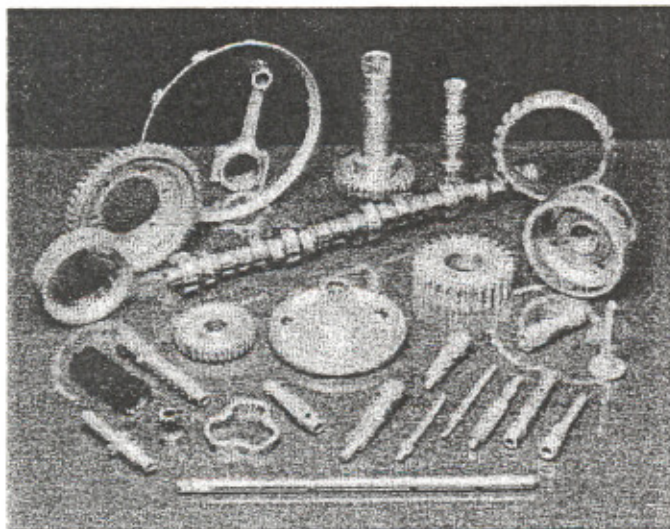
Racks, rods, camshafts, axles, gears, and other critical components are good candidates for induction tempering
